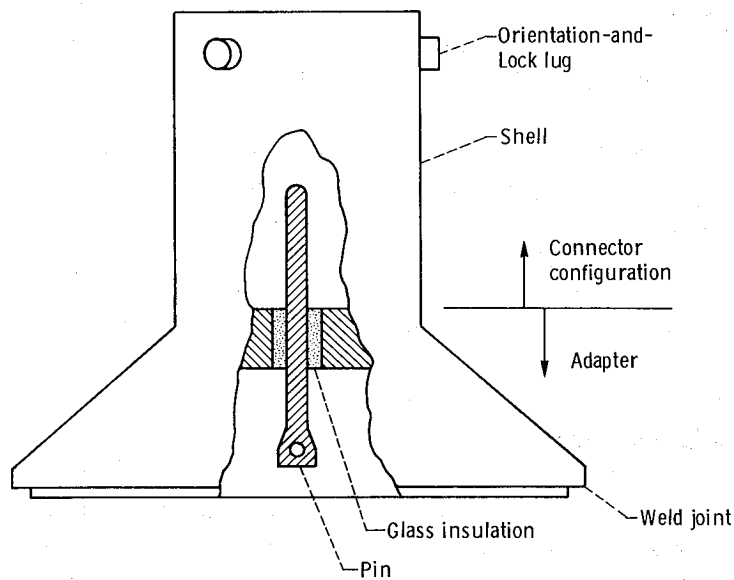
Sketch of electrical connector for hermetically sealed coil enclosure.
